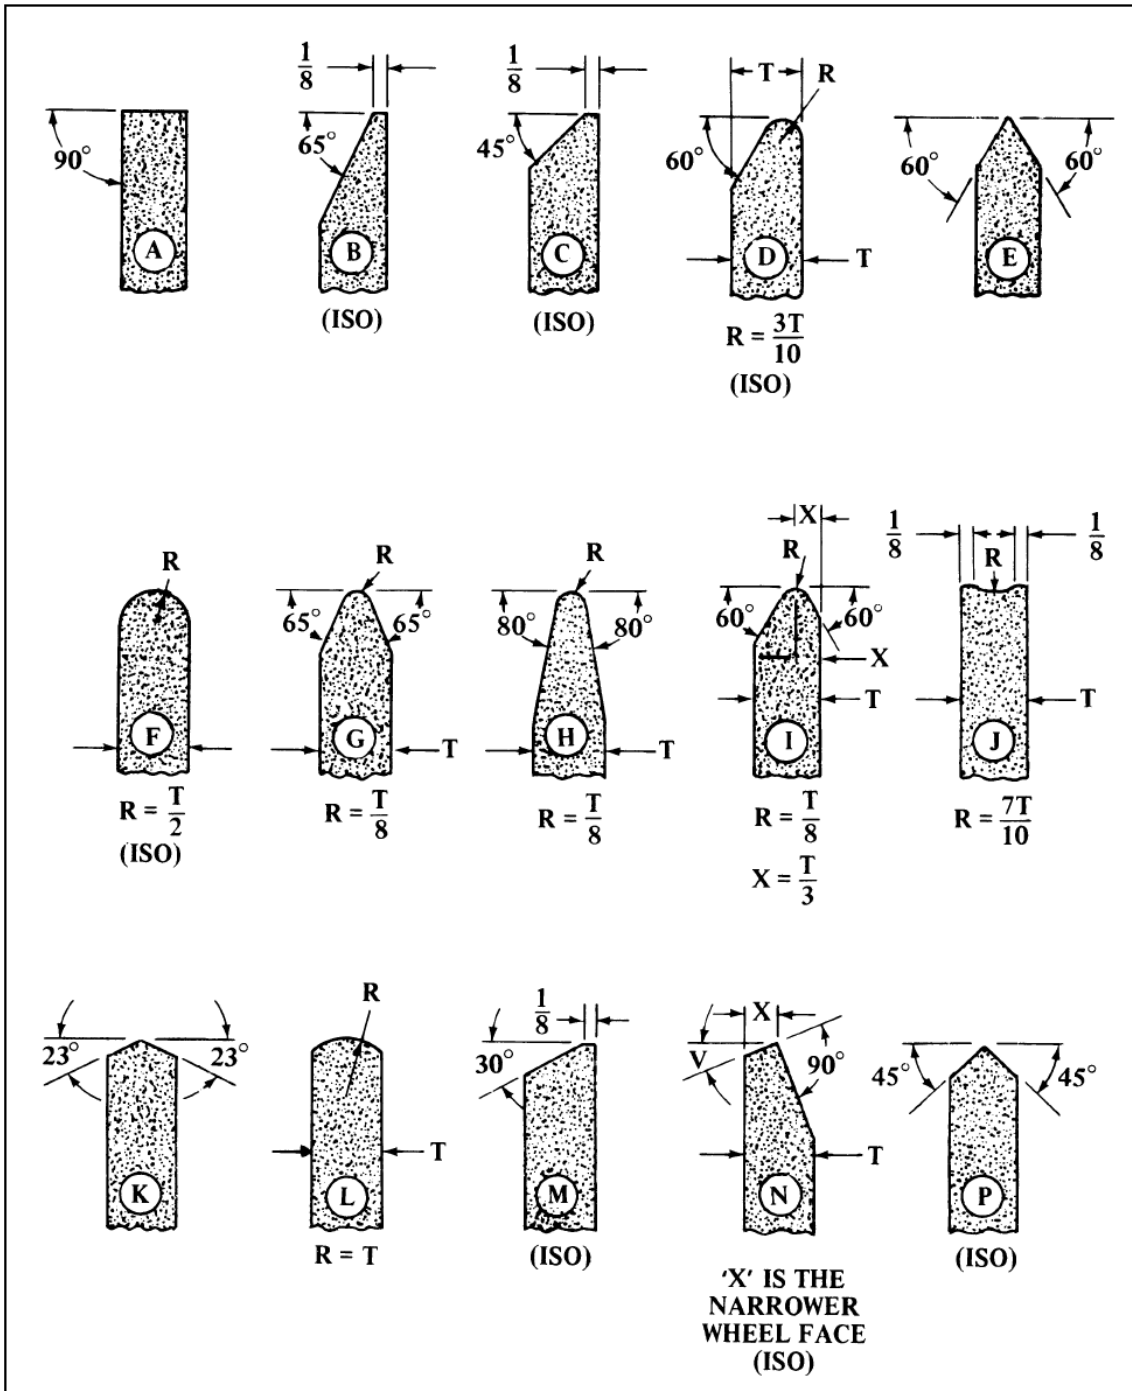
Standard Shapes of Grinding Wheel Faces ANSI B74.2-1982
